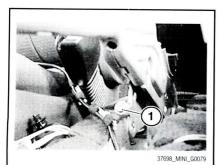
Release adjusting fixture (1) for parking brake Bowden cable
